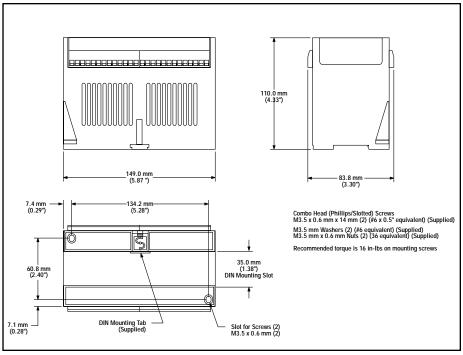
Control Module Dimensions and Mounting Hole Locations.
